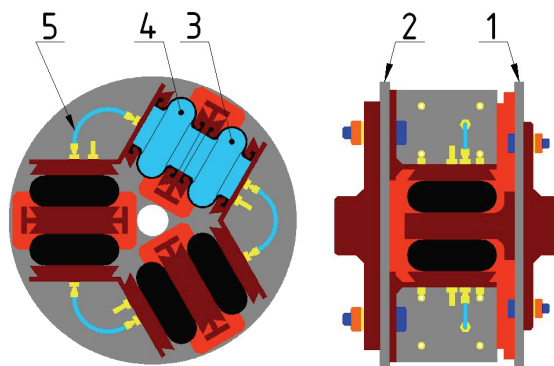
Scheme of the pneumatic flexible differential shaft coupling.
